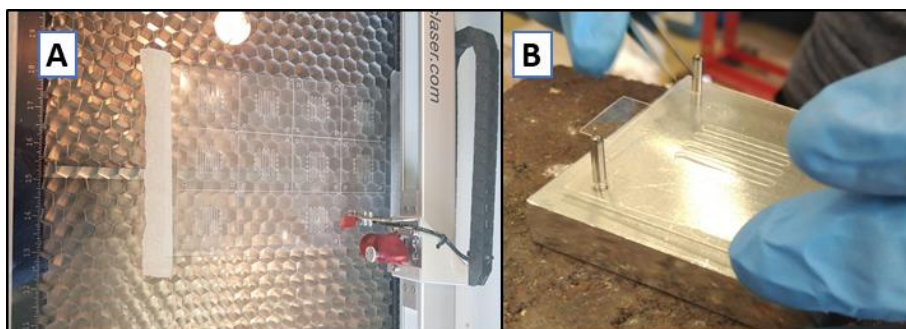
OOCv2.0 Fabrication. A) Array of COP layers being cut in the Trotec Speedy-100; B) Layers assembly using the aluminum aligner.
